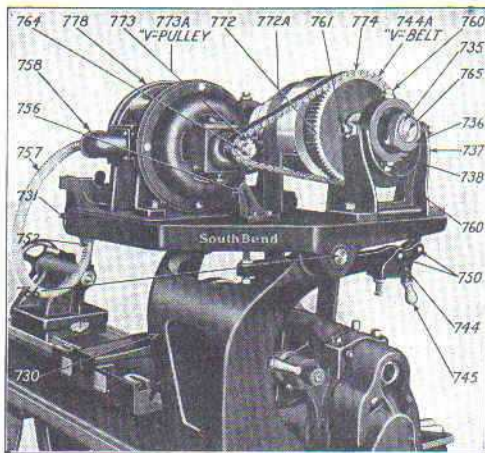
End View of Silent Chain Motor Drive Unit Showing Location of Parts and Numbers.
